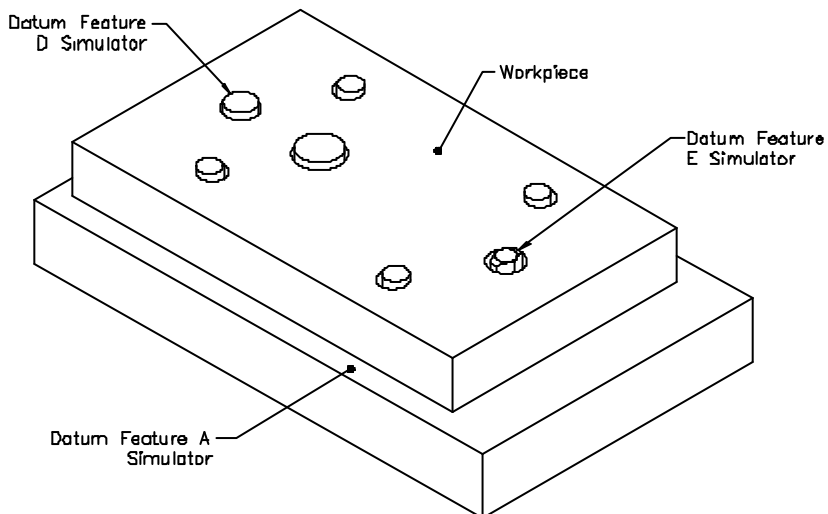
Gage for verifying five holes in Fig. 19-13
